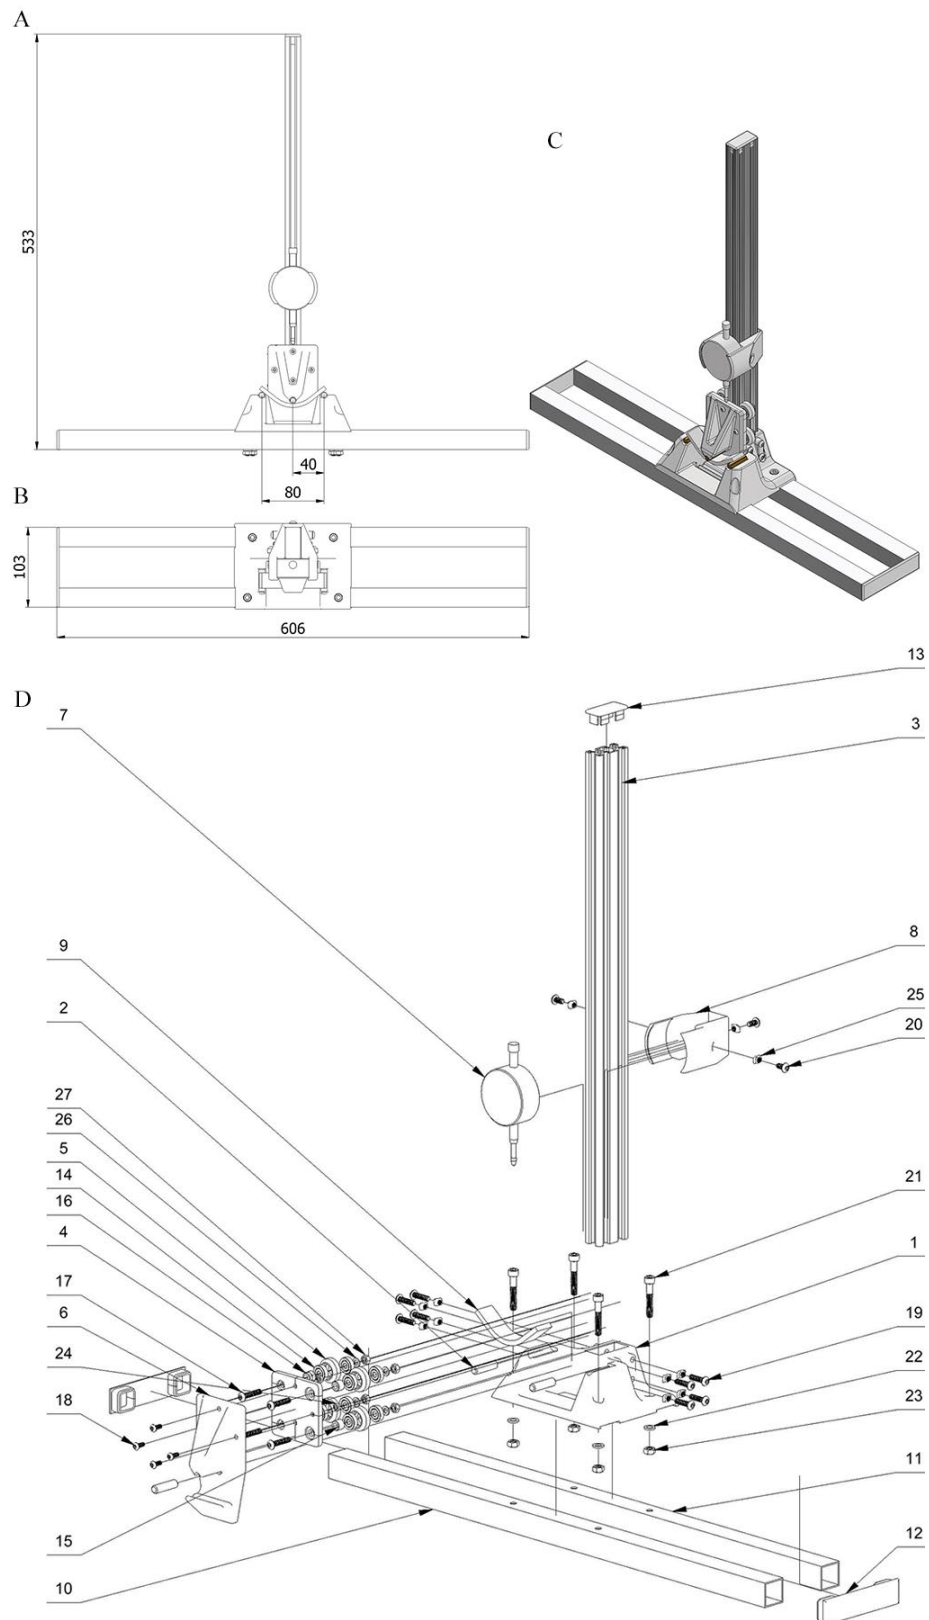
CAD model of the pandemic tool assembly for three-point bend test. A) front view. B) top view. C) isometric view. D) exploded view. Numbers in D are explained in Table 2.2. Numbers 553, 103, 606, 80, 40 in A-B indicate height (mm), width (mm), length (mm), distance between supporting pins (mm), and distance between loading pin, and supporting pin (mm), respectively.
